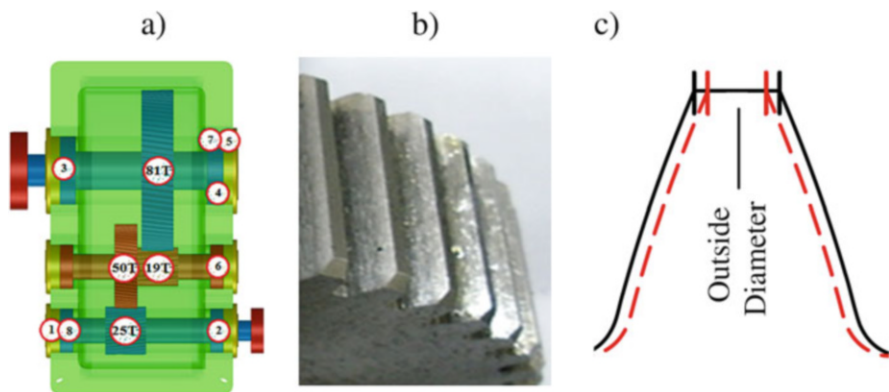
(a) Gearbox schematic. (b) Partial gear wheel. (c) Tooth material removal
